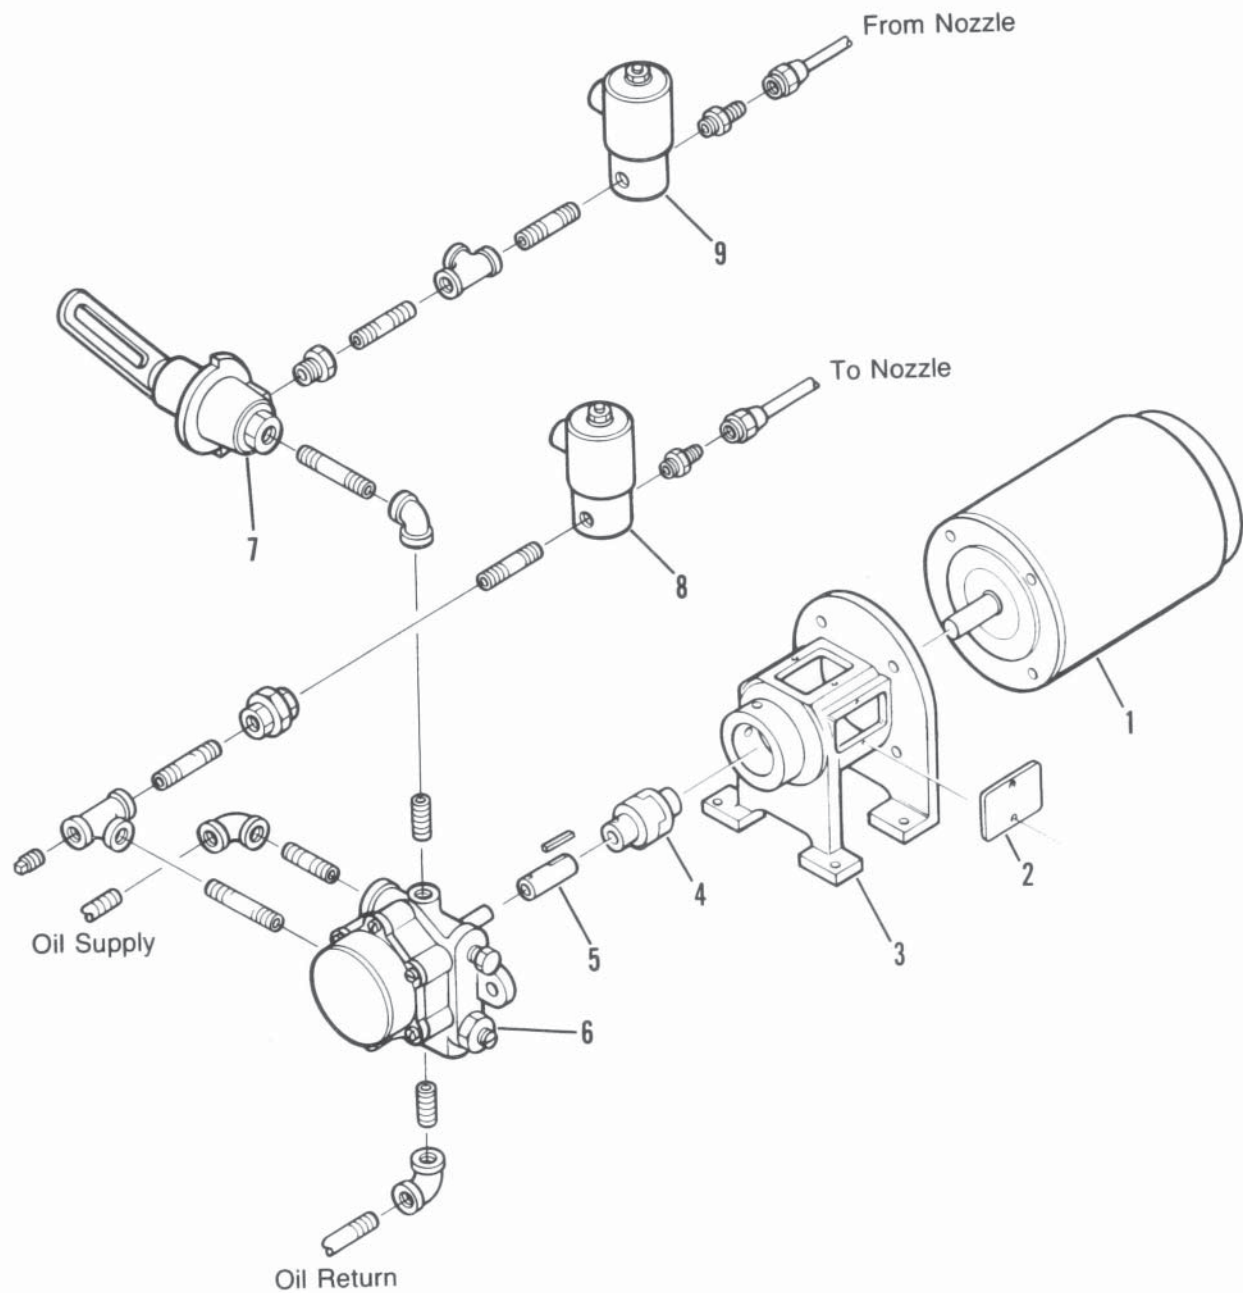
OIL PIPING ASSEMBLY, PRESSURE ATOMIZING - ML
